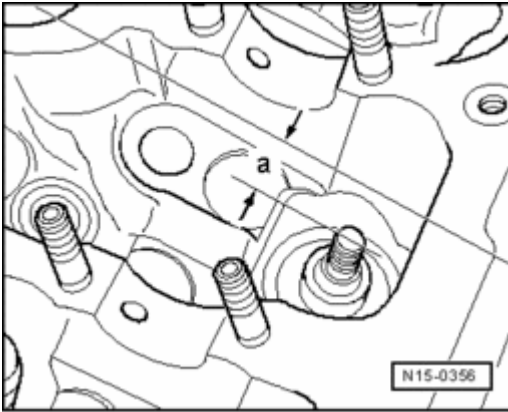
Identifying Distance Between End Of Valve Stem And Upper Edge Of Cylinder Head
